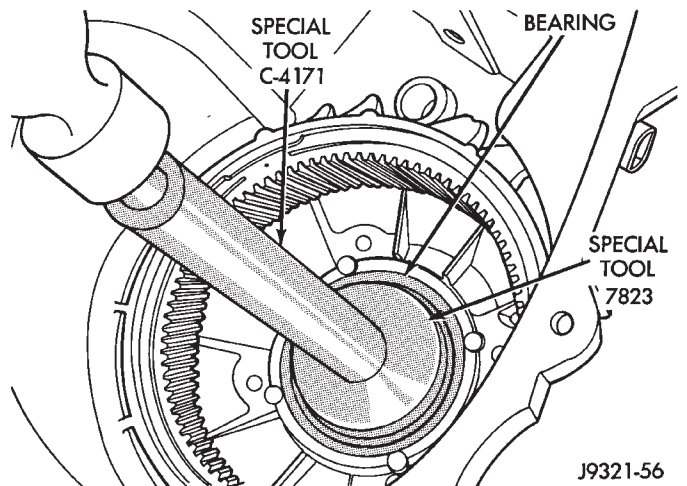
Installing Front Output Shaft Rear Bearing
